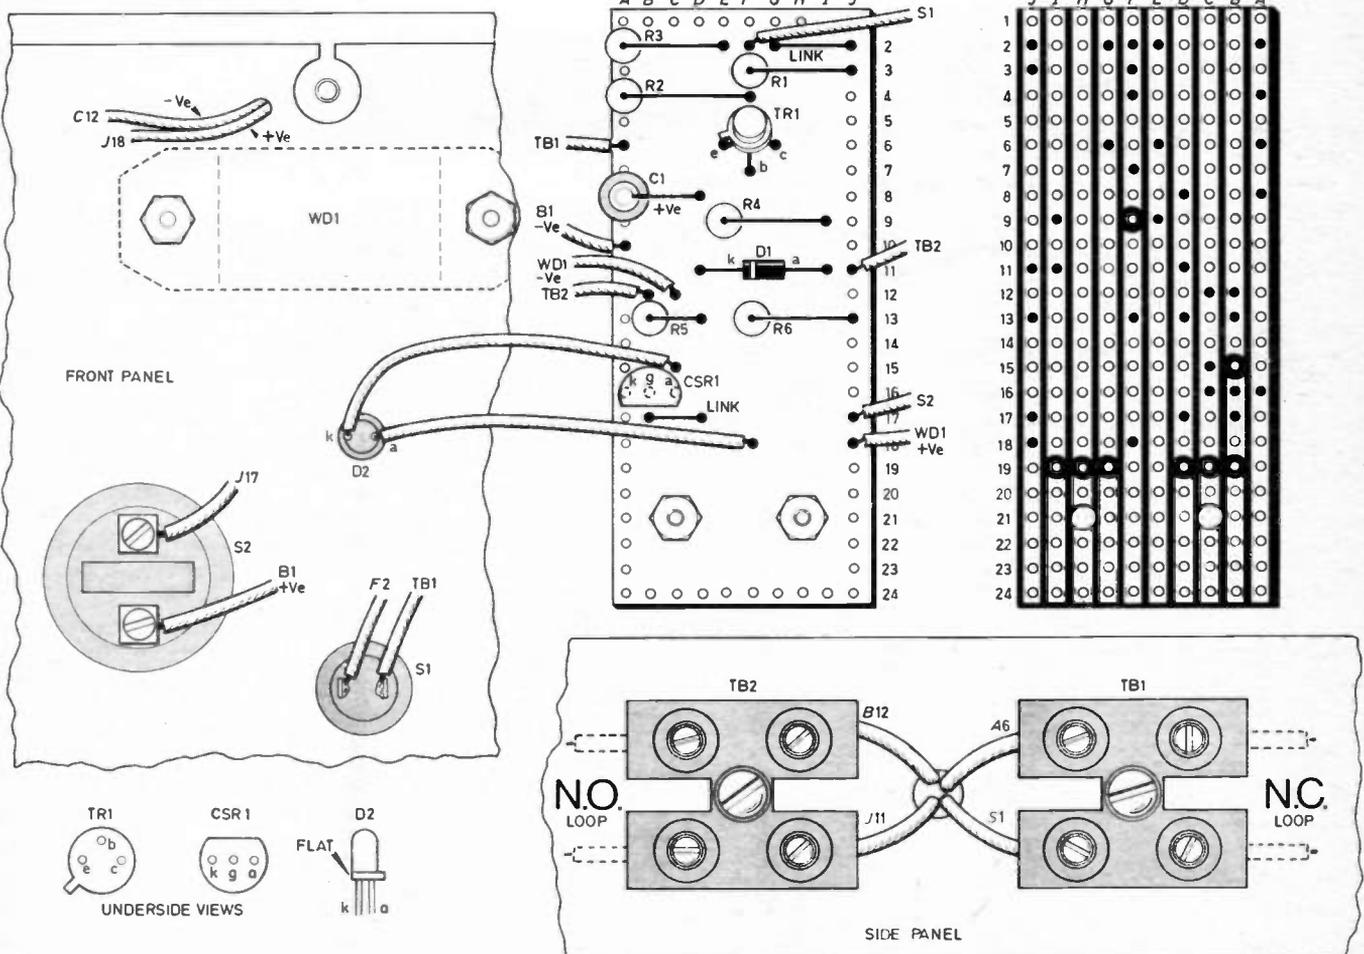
Complete construction details showing interwiring between board and case mounted components, and layout of the components on the top side of the stripboard.
